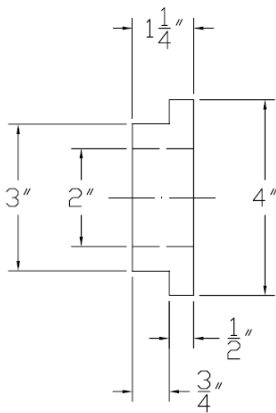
Big Inserts for 1-1/8" and 1-1/4" Bolts
